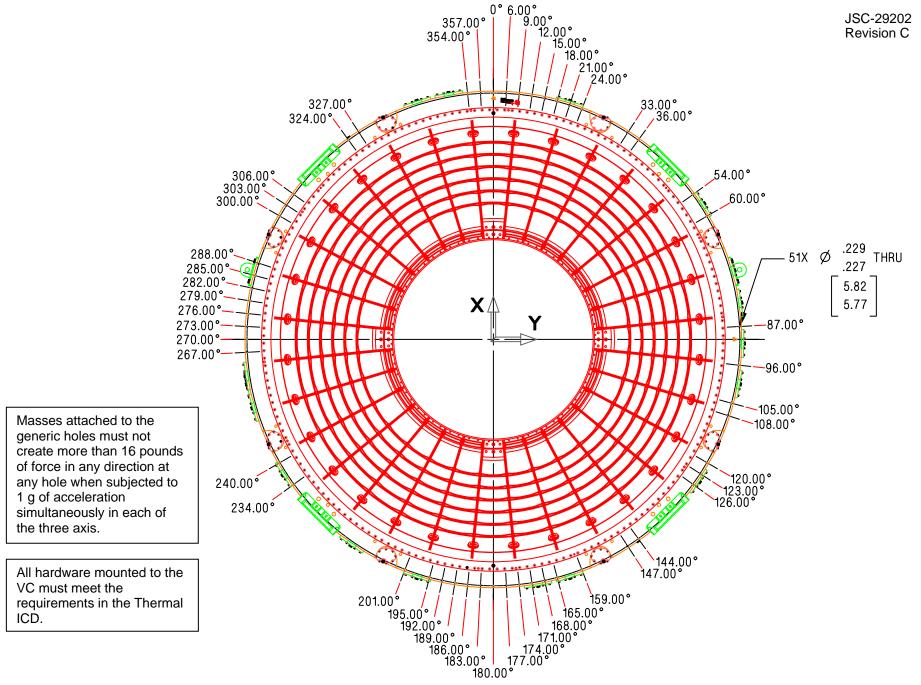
Generic Bolt Hole Pattern on VC Lower Support Ring
